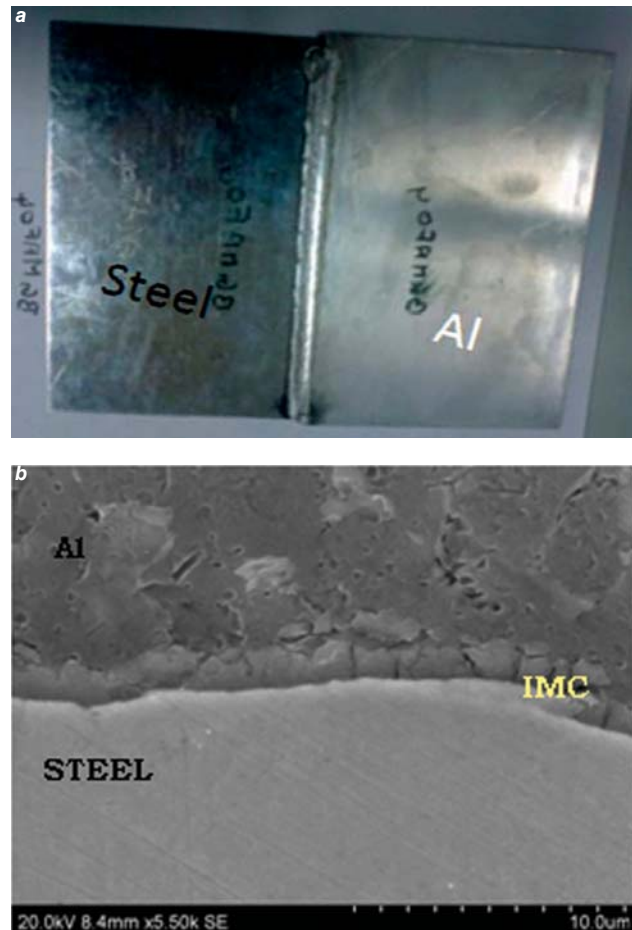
a) CMT weld brazed Al-Steel lap joints and b) SEM micrograph of the interface
